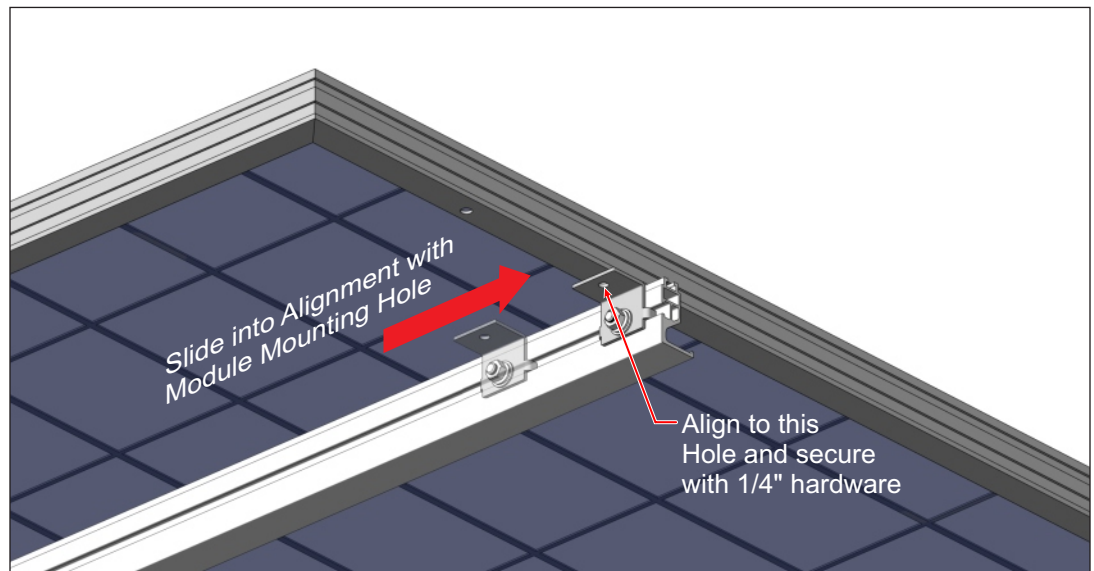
Aligning the Single Hole Slide Plate with PV Module Mounting Hole
